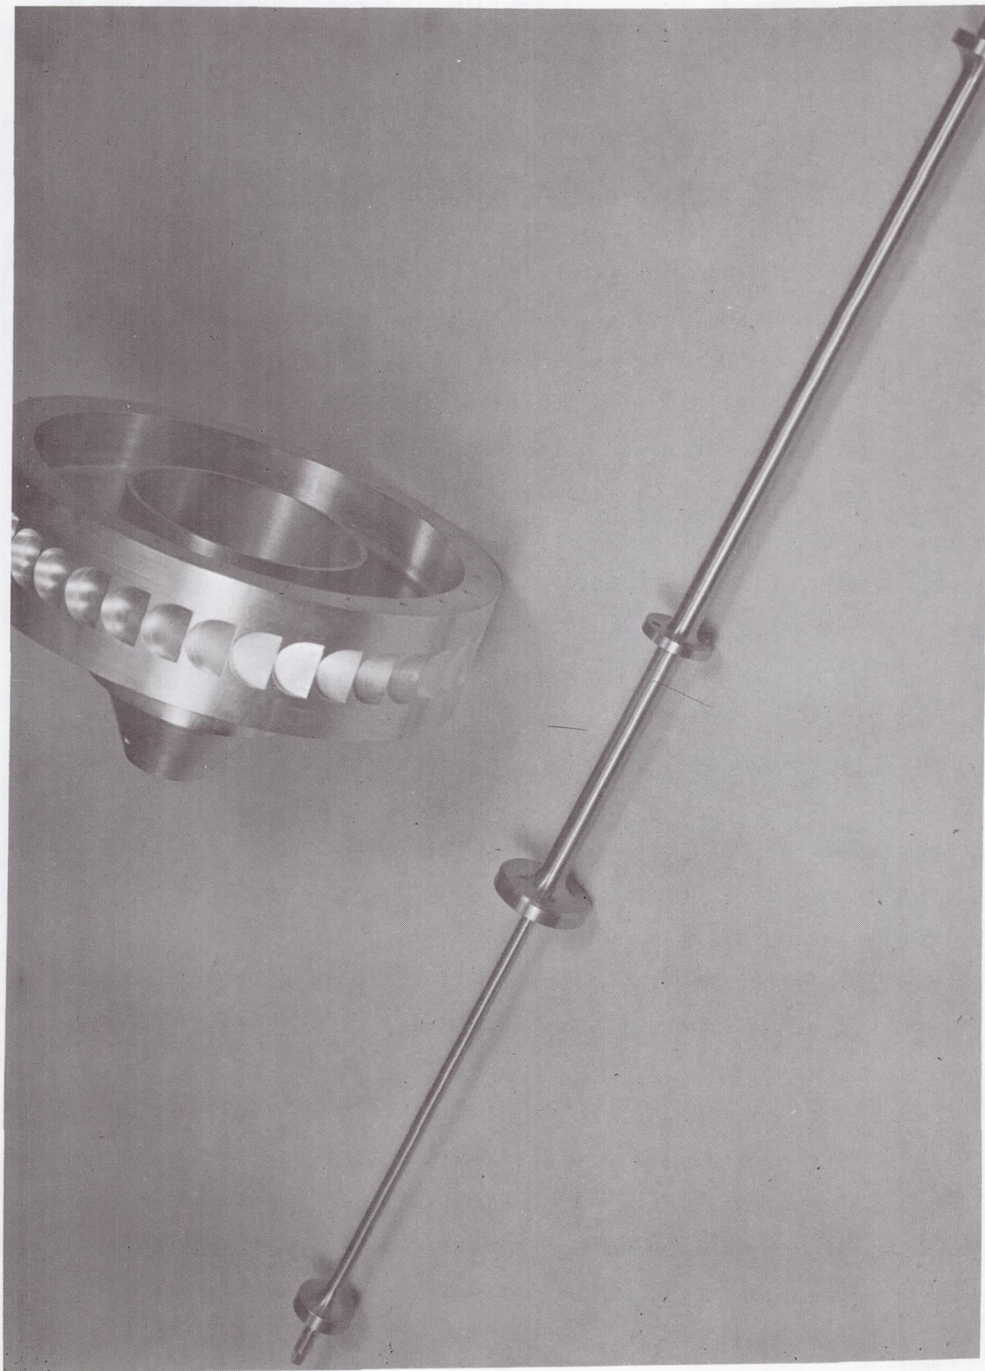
View of Impulse Turbine Wheel and Tie Bolt for Rotor-Bearing Simulator (Initial Configuration)
